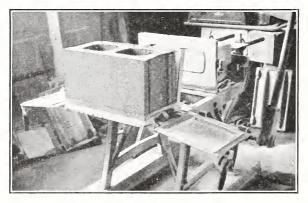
Horizontal face block machine used in the hand-tamping process Note the withdrawn cores and the block turned on bottom ready for removal from the machine.
